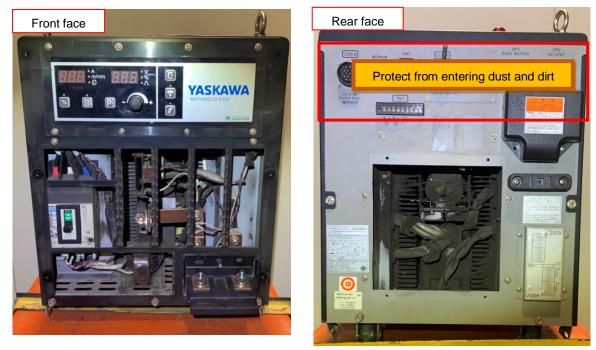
Welder situation when Blowing Compressed Air
